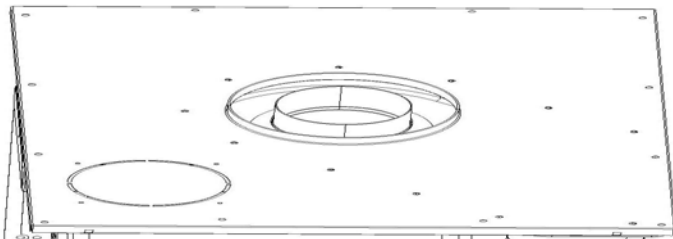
Roof Jack Mounting Collars – Top of Furnace
